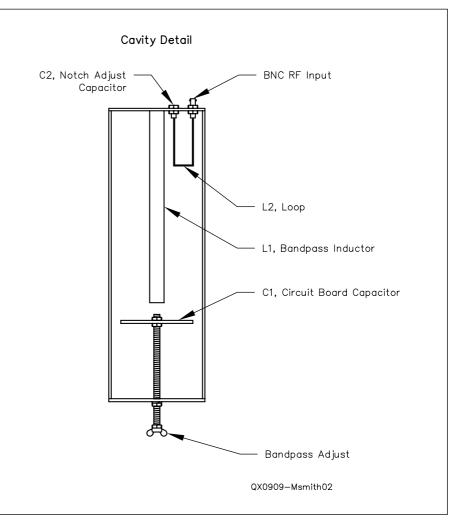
This drawing shows the internal workings of a duplexer cavity.
